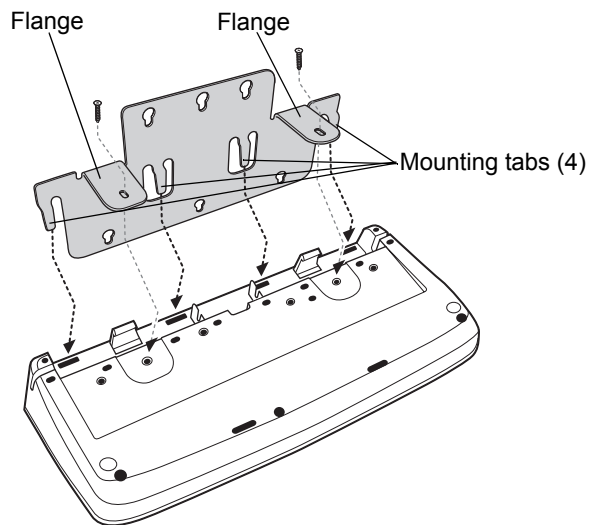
Insert Bracket into CHS5000-8000CR Cradle
